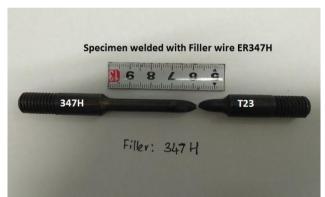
Hot tensile tested specimen piece (SS347H+T23 with filler wire ER347H).
